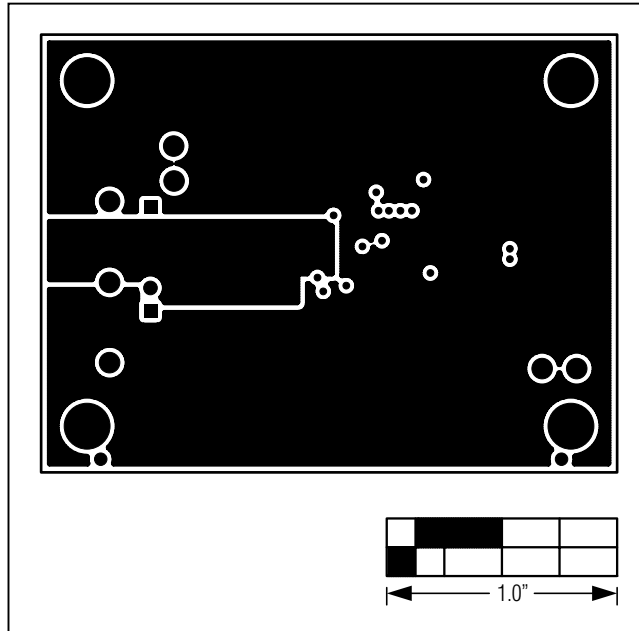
MAX16952 EV Kit PCB Layout—VCC Layer 2
